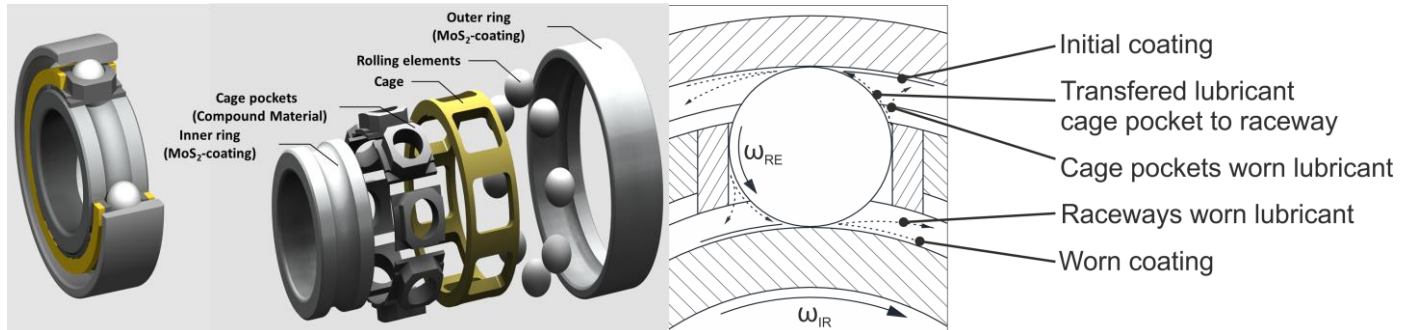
Left: Assembly of the investigated solid lubricated rolling bearings. Right: Transfer of solid lubricant within rolling bearings
